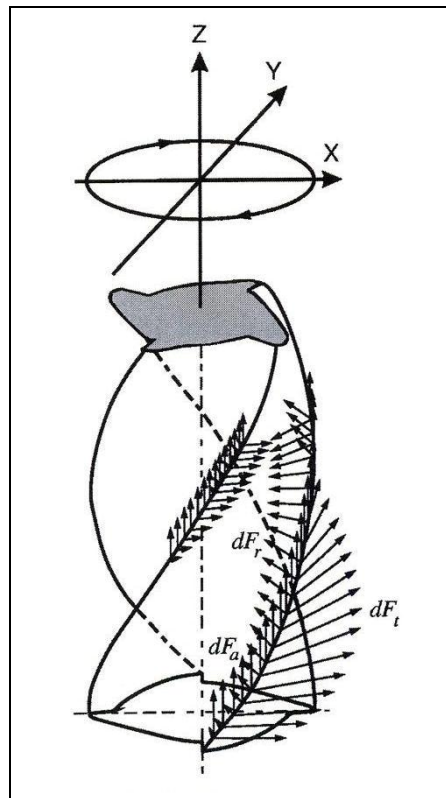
3D end mill with incremental force acting along the flute of a cutter [86].
